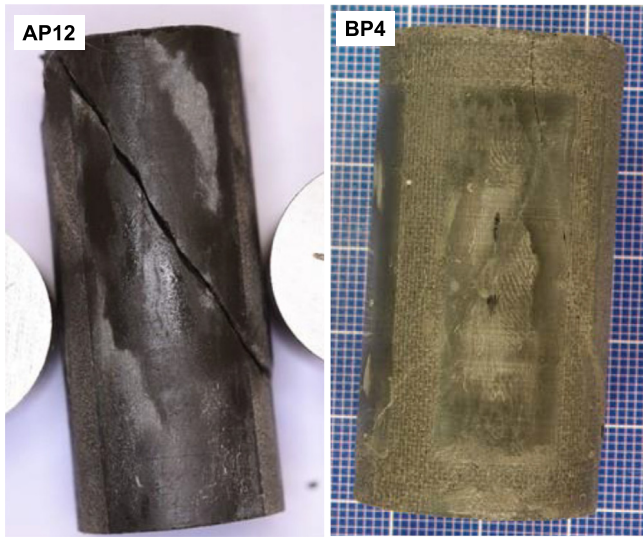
Examples of specimen after testing (P-tests) showing the presence of one (left) or multiple (right) distinct fractures.
